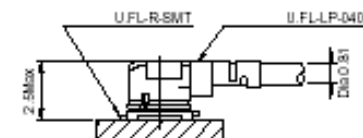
U.FL-LP-066 and U.FL-R-SMT
